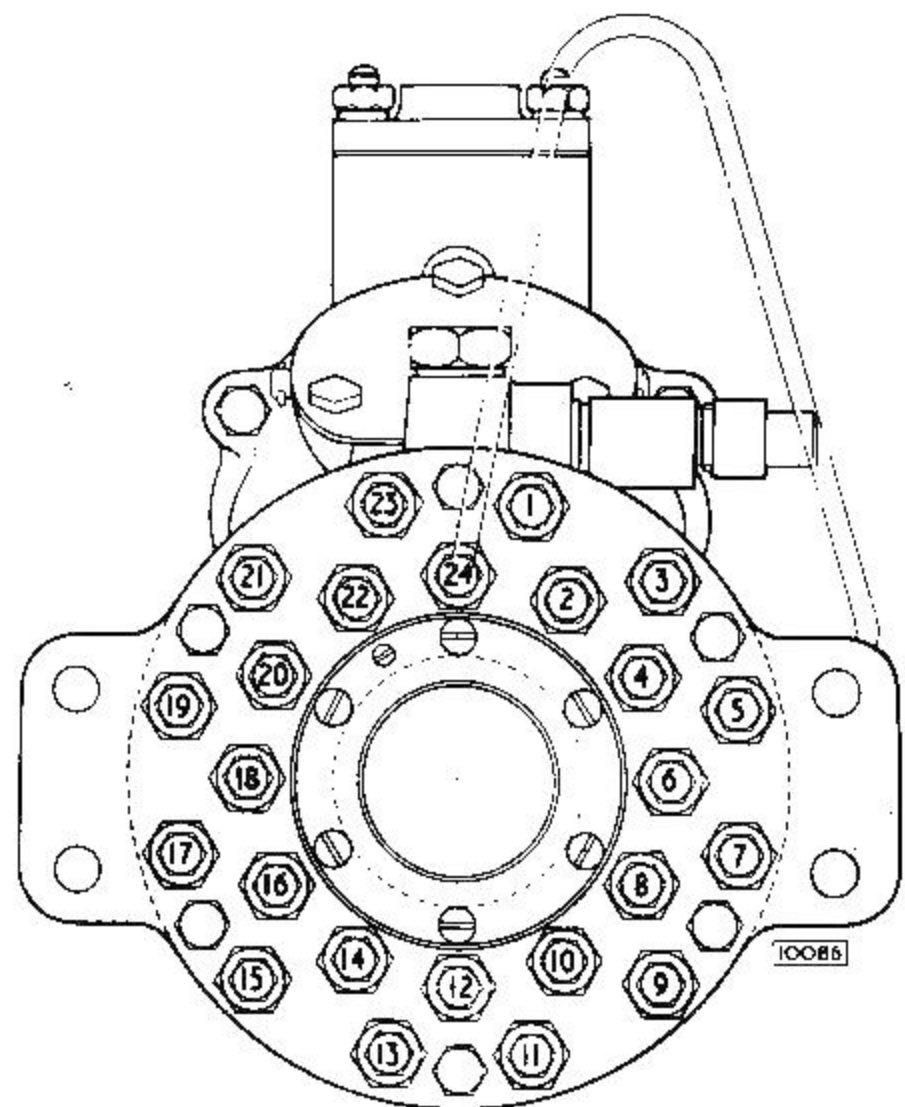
End view of lubricator pump showing connections numbering sequence.
